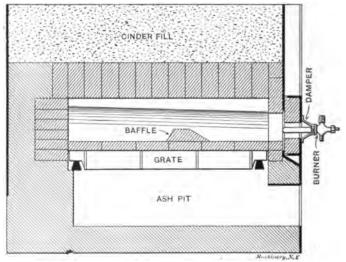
Longitudinal Section of Refitted Casehardening Furnace
